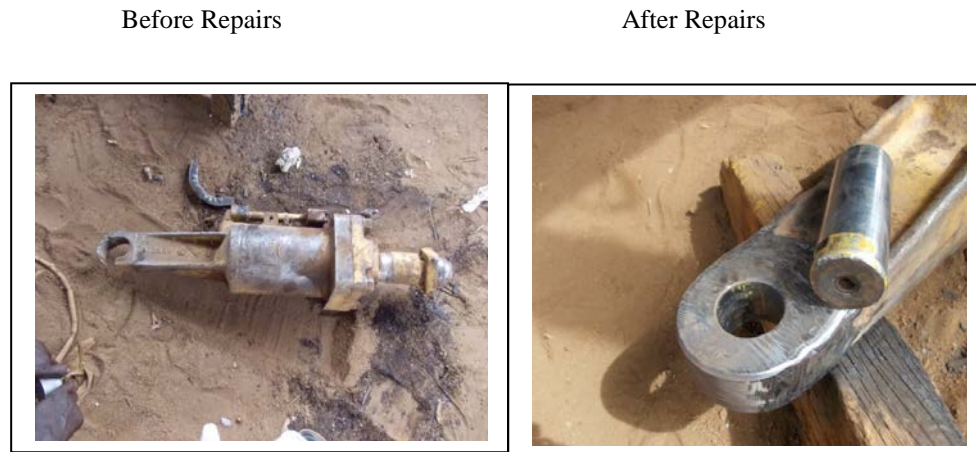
Repair Welding on Tilting Arm of Dozer Using E7018 for Build-up and E6010 for Penetration
